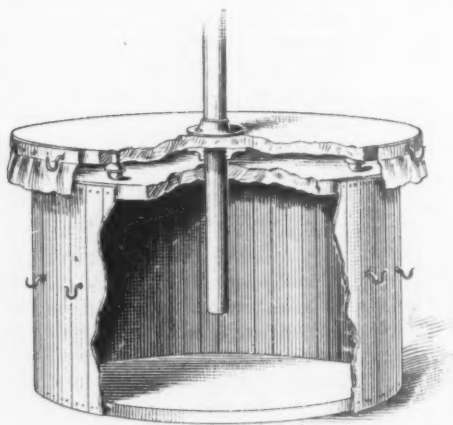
Detail of Lower Section of Revolving Gun Rack.
